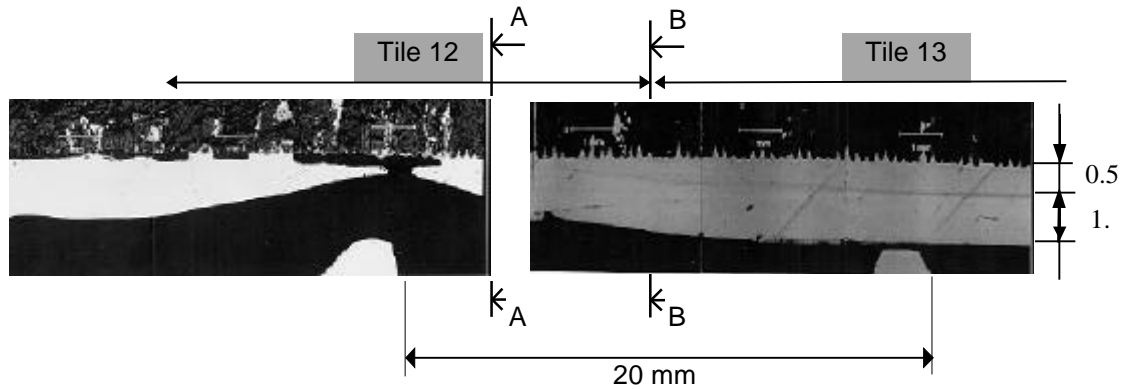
Destructive examination of tiles 12 and 13 after CHF, longitudinal section showing how the copper layer has been drawn up at CHF
